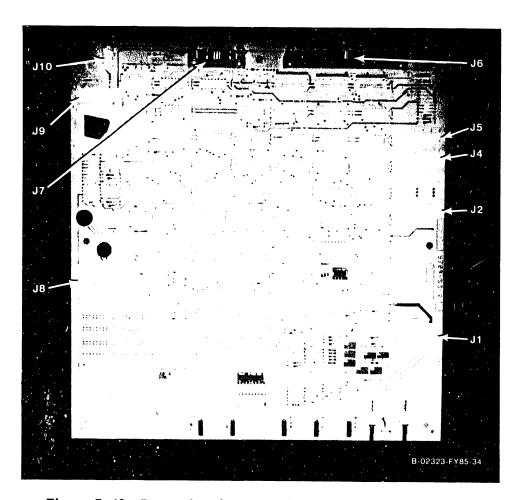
Power Supply Controller Board. (Rev. 0 Version)
